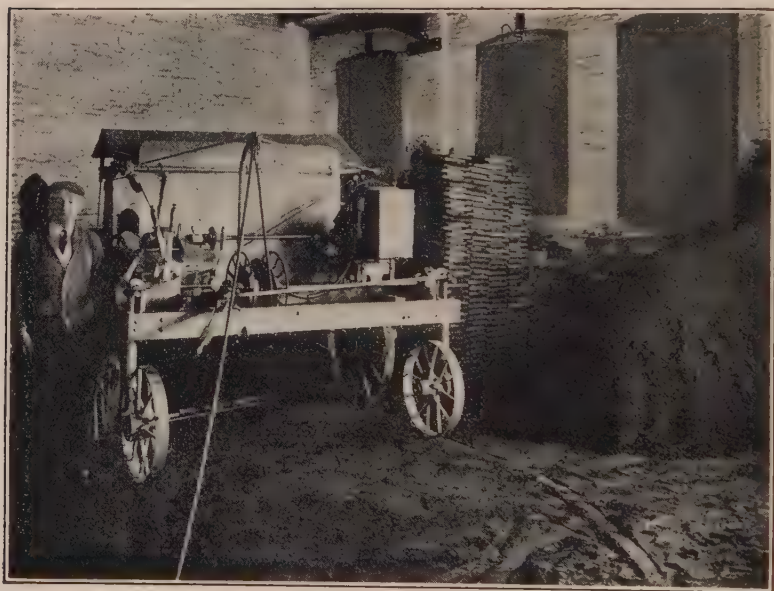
Rear View of Auto Sand-Heap Cutting Machine.
